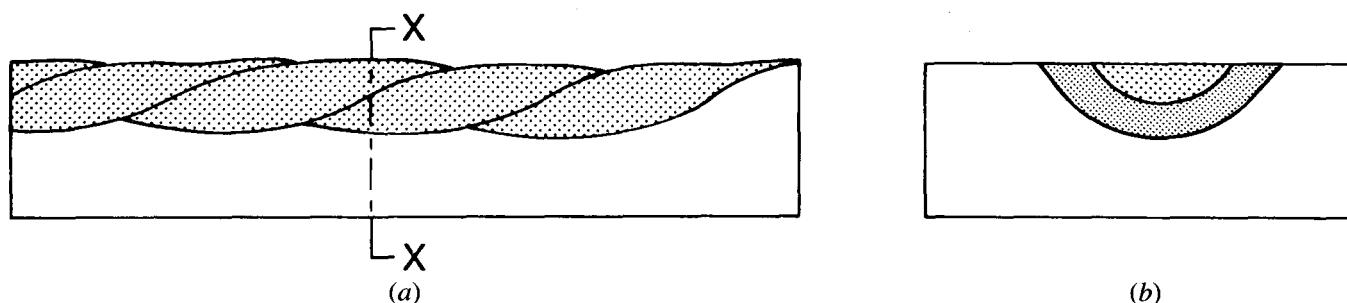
Schematic section of a bead on plate weld for pulsed laser welding: (a) longitudinal section; (b) transverse section.
